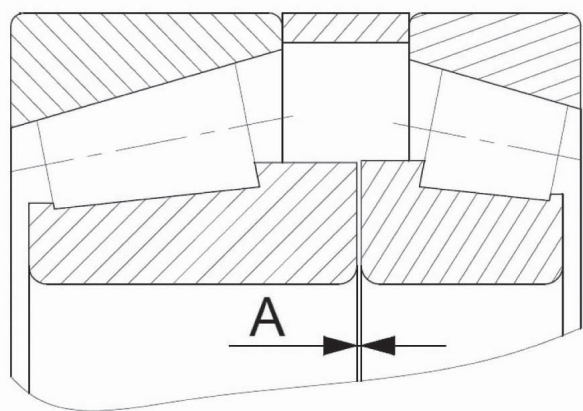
Internal axial clearance (A) in a system of tapered roller bearings
